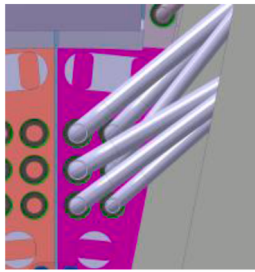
Clash of pipe extensions on lower inboard blanket.
